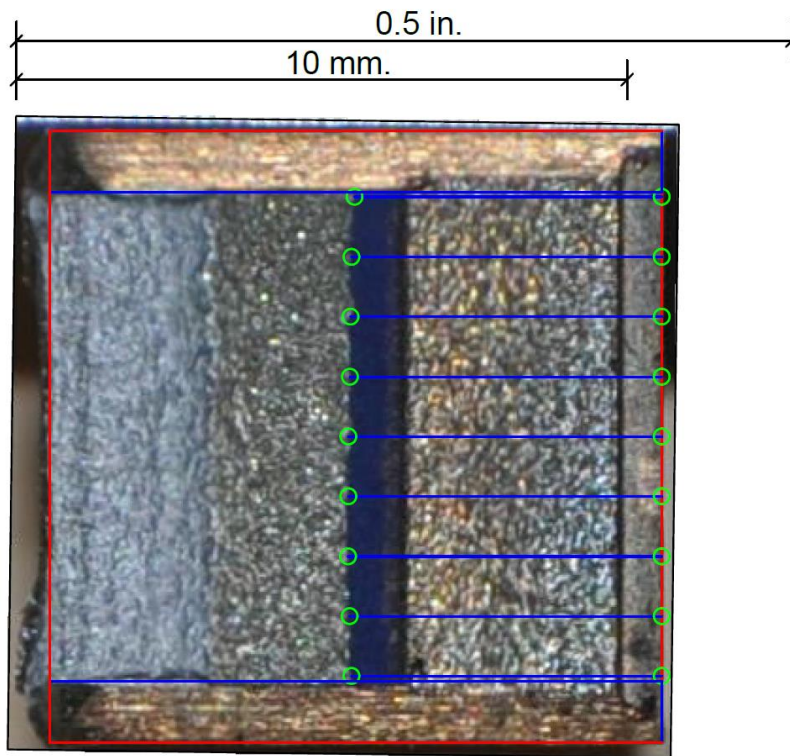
Specimen I8' Fracture Surface
